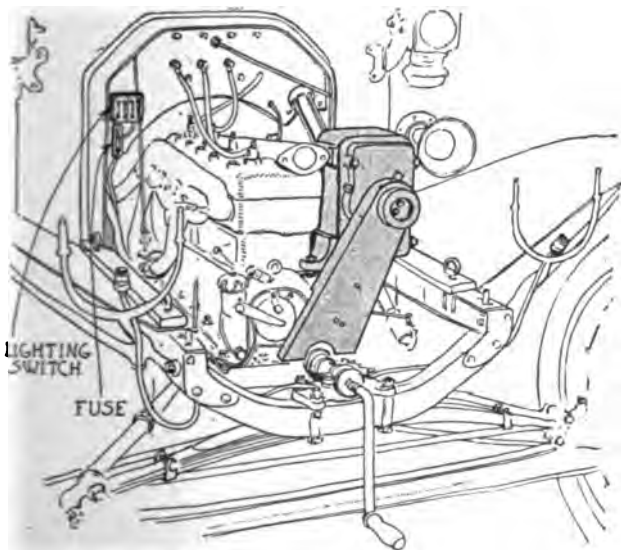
View of Westinghouse installation on the Ford car, showing chain guard in place and part of the wiring
